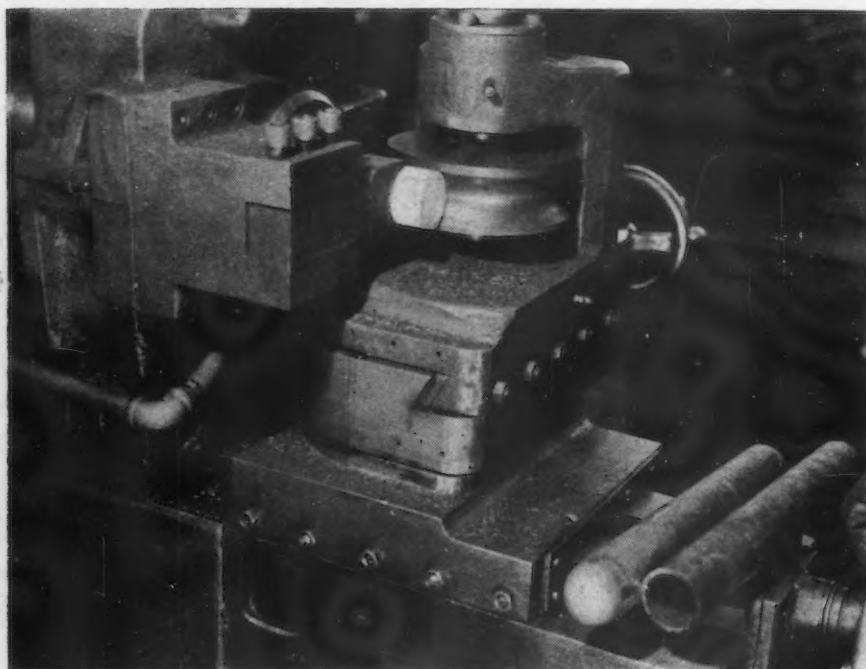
Preheated tube at beginning of the spinning operation. Note the cold and the closed tubes on table of machine.
